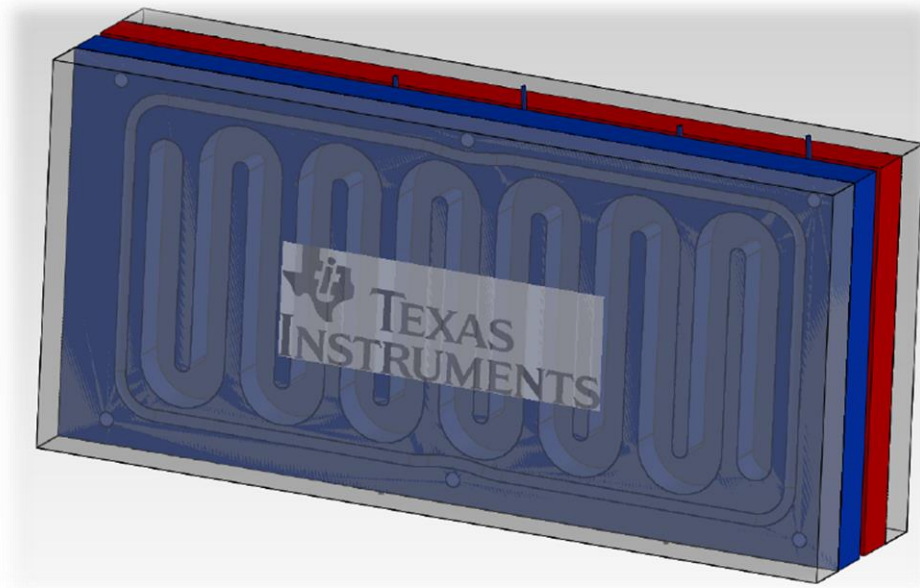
TEC water-cooling channel displaying the cold channel and the hot channel sides
